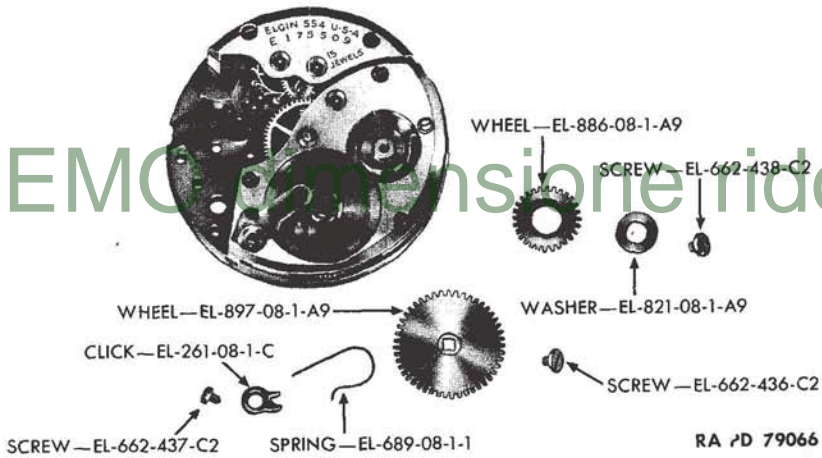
Elgin Wrist Watch — Winding Wheels and Click Assembly Removed
